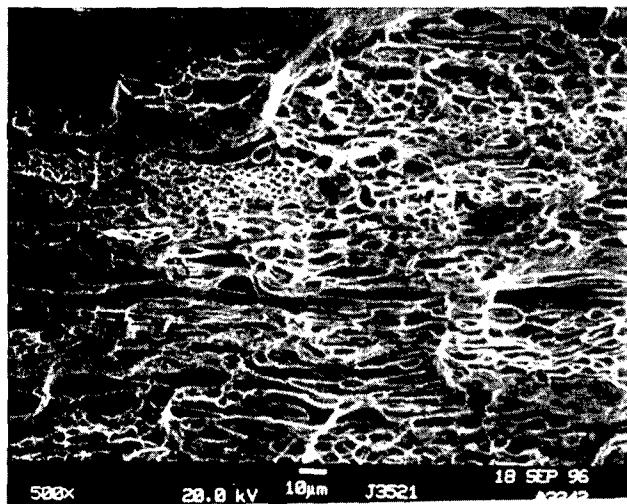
Ductile dimple rupture type of fracture observed in the "woody" areas of the fracture surface.
